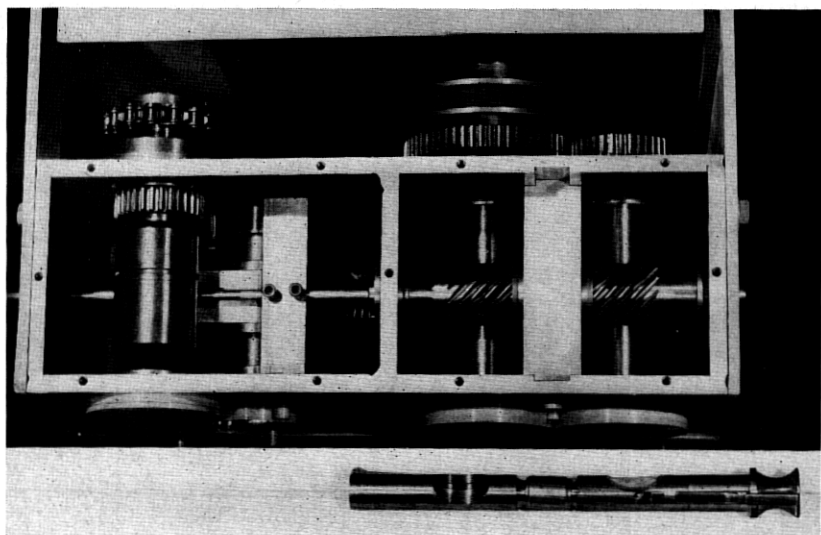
Experimental machine with one double head, prototype of 24 and 30 double head wire straightening machines.
